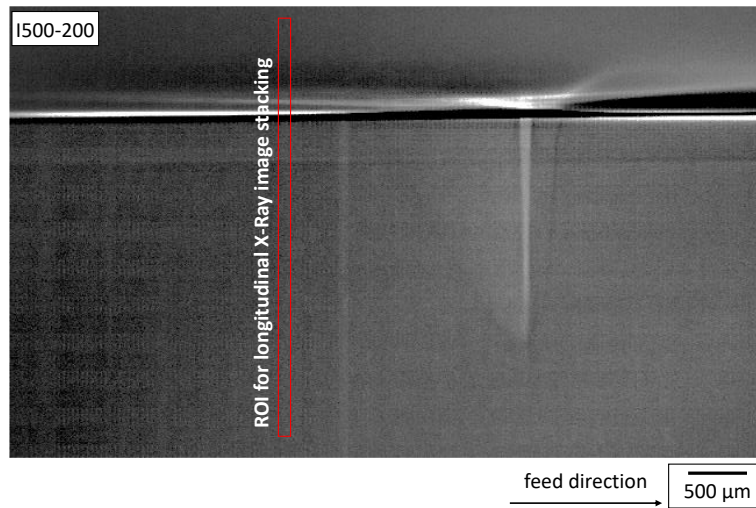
longitudinal image stacking for reconstruction of a weld seam from tomography images
